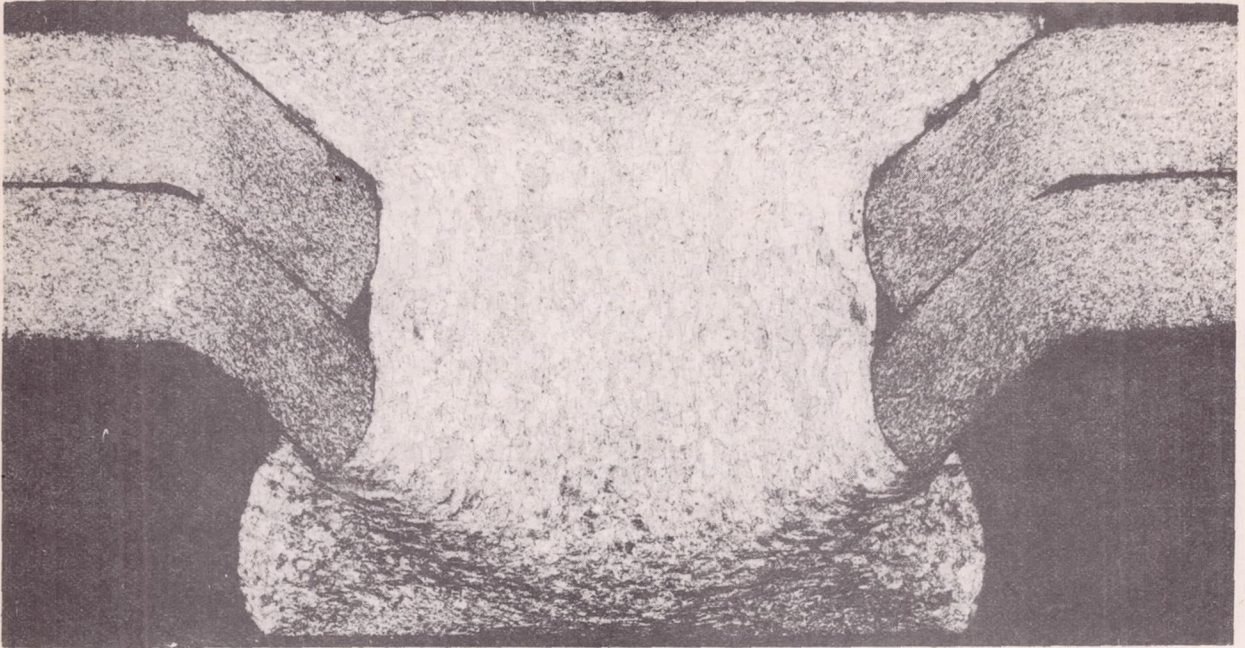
Set of dimples produced with 5000-pound pressure in 0.040-inch 24S-T sheet drilled with an 0.1100-inch diameter No. 35 drill. Magnified 20 times.
